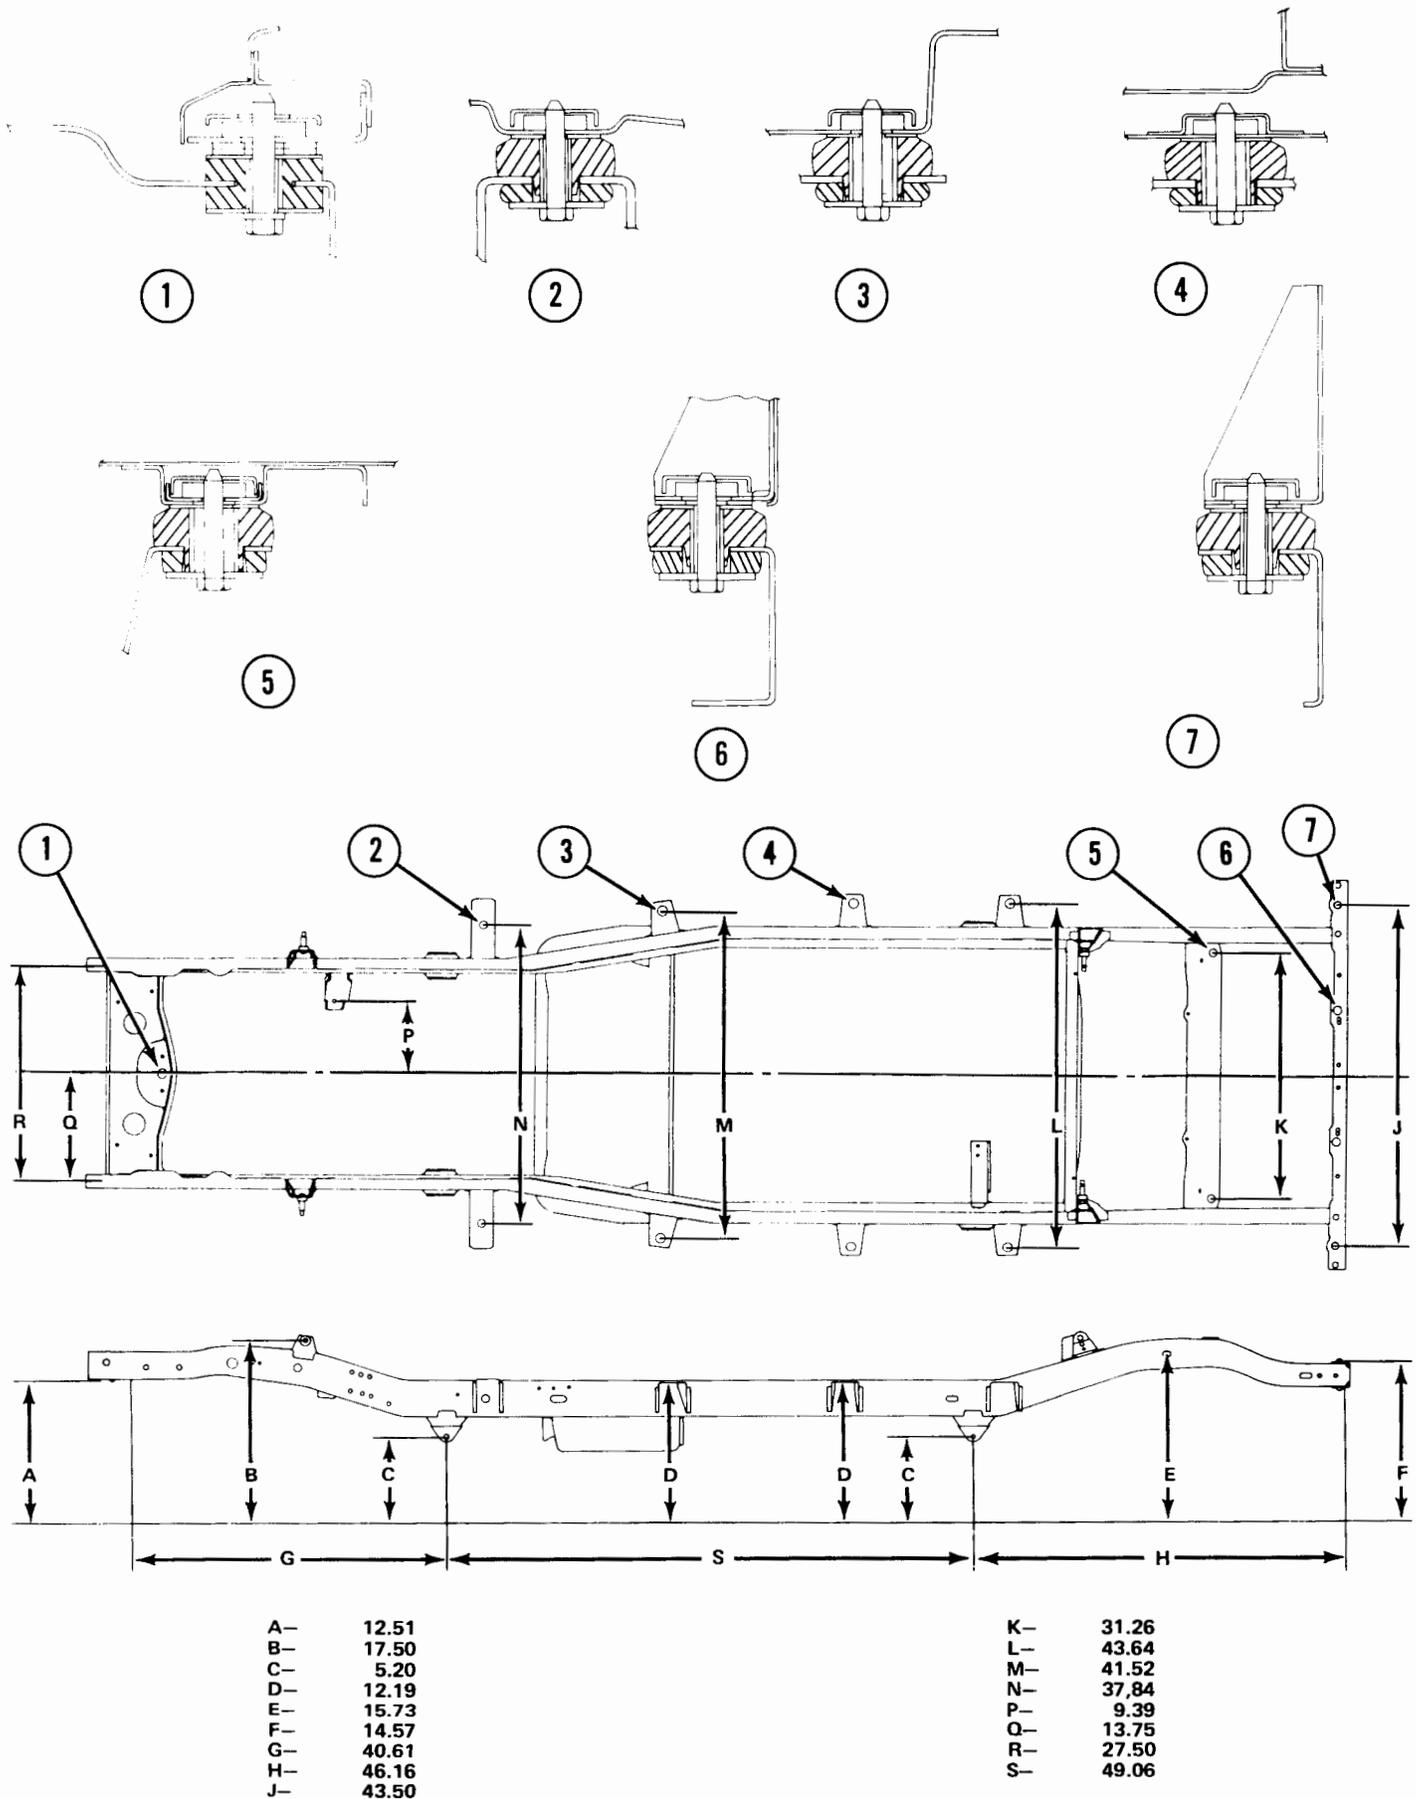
CJ-7 Model Frame Dimensions (Inches)
